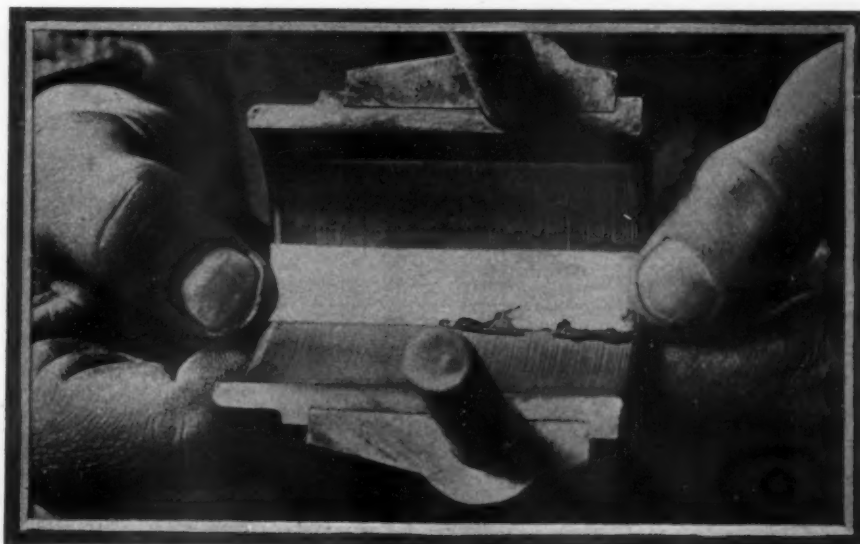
If there is to be any clearance in the bearings the way to obtain this is shown in this illustration. The operator is seen laying a strip of paper the required thickness in the bearing
